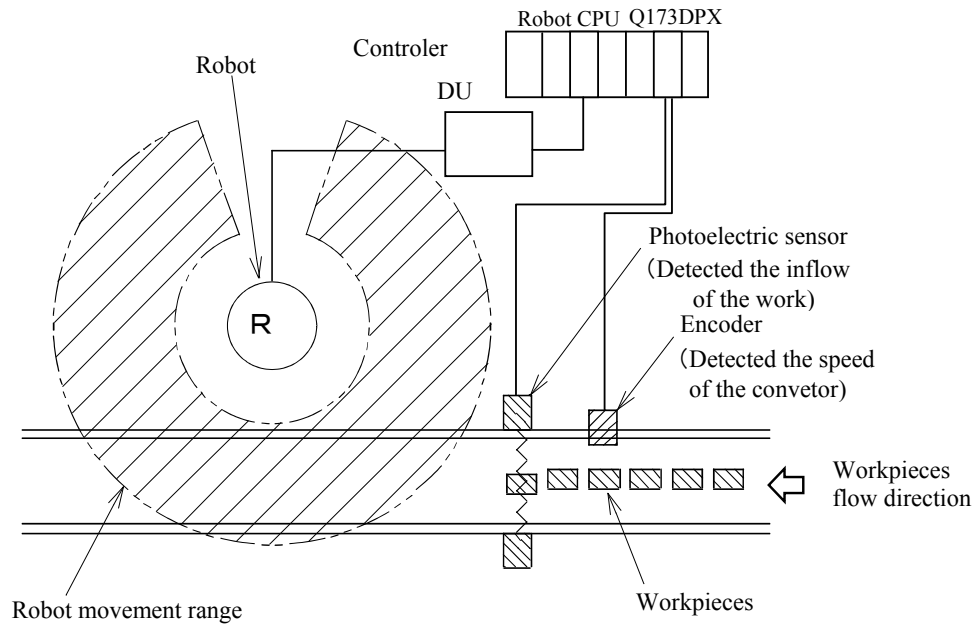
Configuration Example of Conveyer Tracking (Top View)
